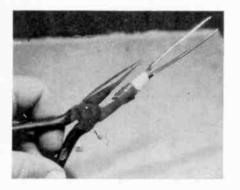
A simple extension tool can be devised to get those inaccessible screws, nuts, etc., by taping tweezers to long-nosed pliers or a spring-type clothes pin.
